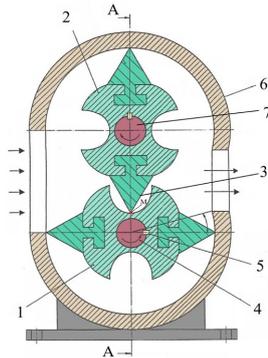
Section through the rotary working machine; 1- lower rotor; 2- upper rotor; 3- triangular piston; 4, 7 - shafts; 5 - wedge; 6 - upper casing.
